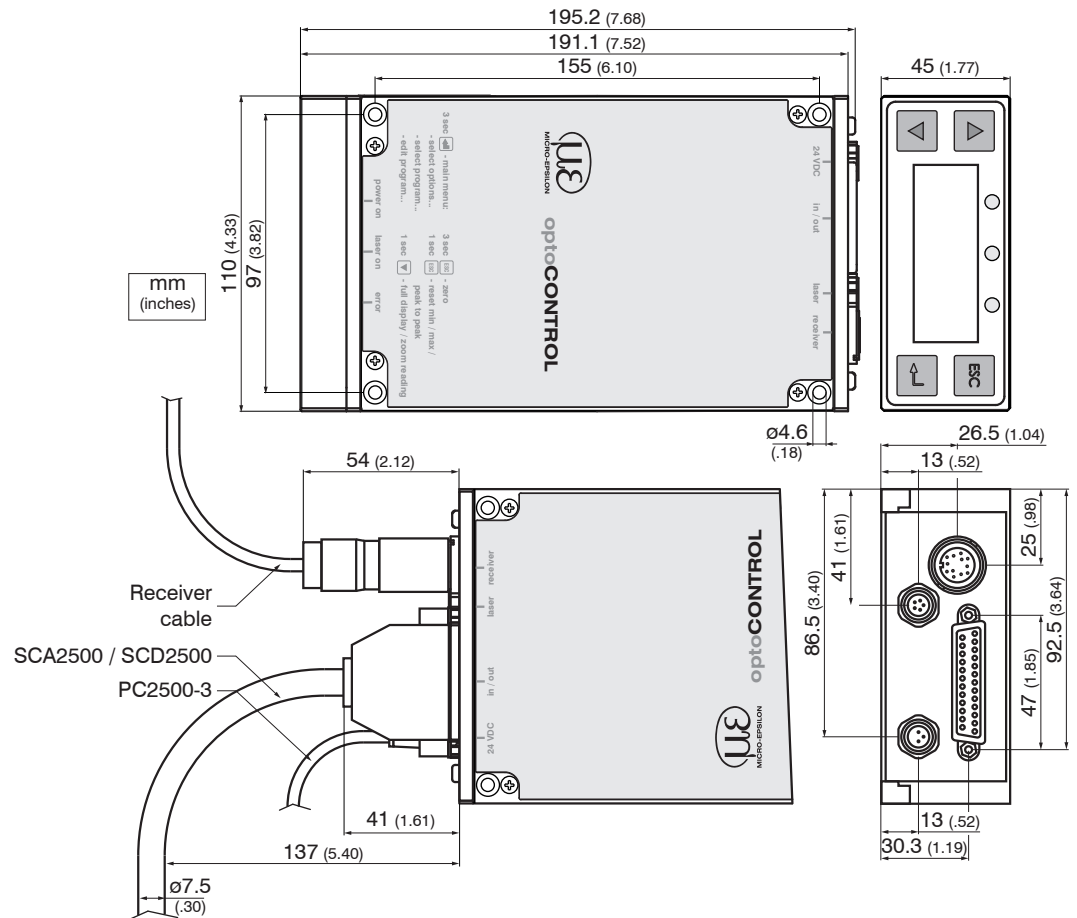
Dimensional drawing controller, dimensions in mm (inches), not to scale
